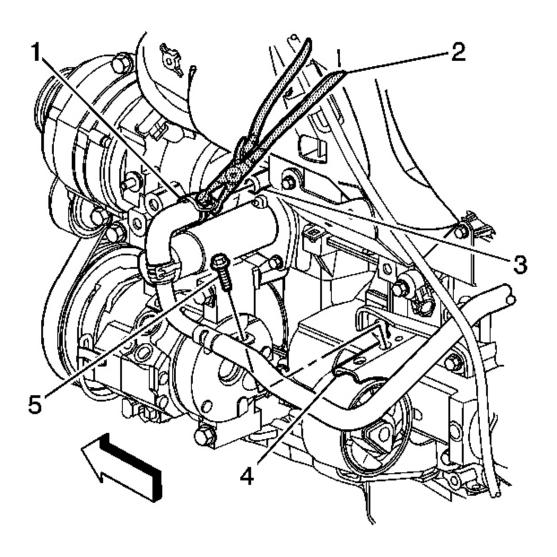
View Of J 38185 Courtesy of GENERAL MOTORS CORP.
